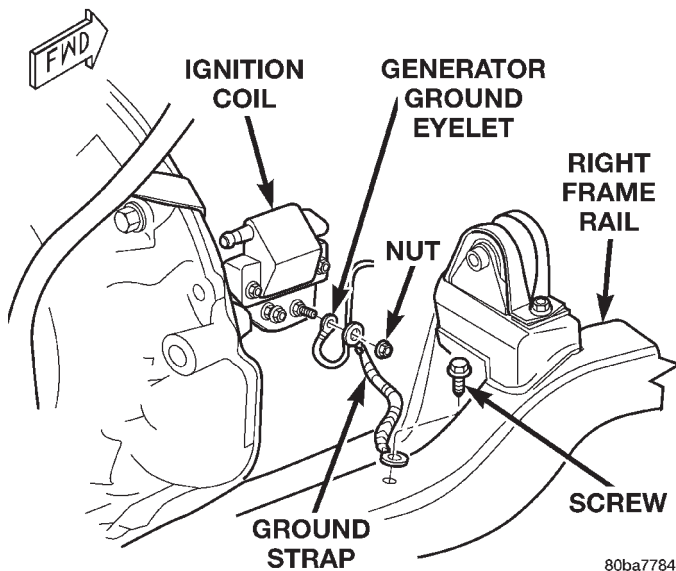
Engine-To-Frame Ground Strap Remove/Install - 2.5L Engine
